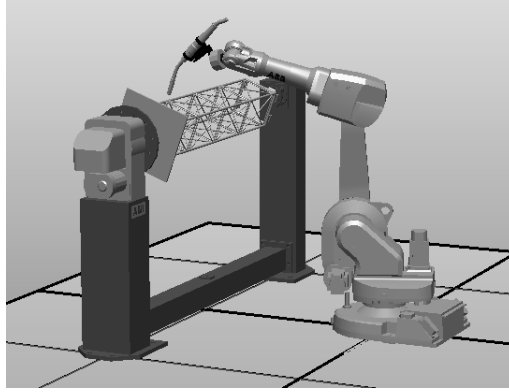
Welding station with a workpiece positioner
